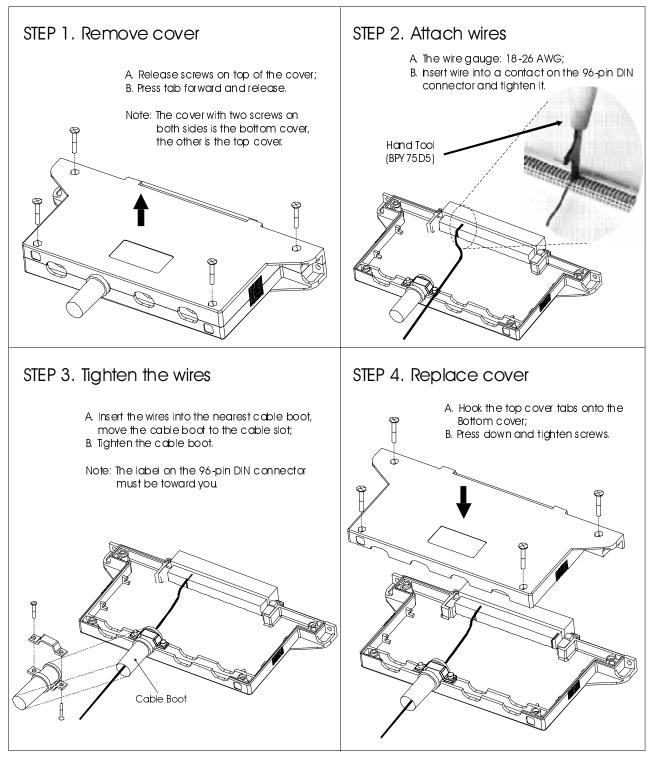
Crimp-and-Insert Terminal Block Wiring
